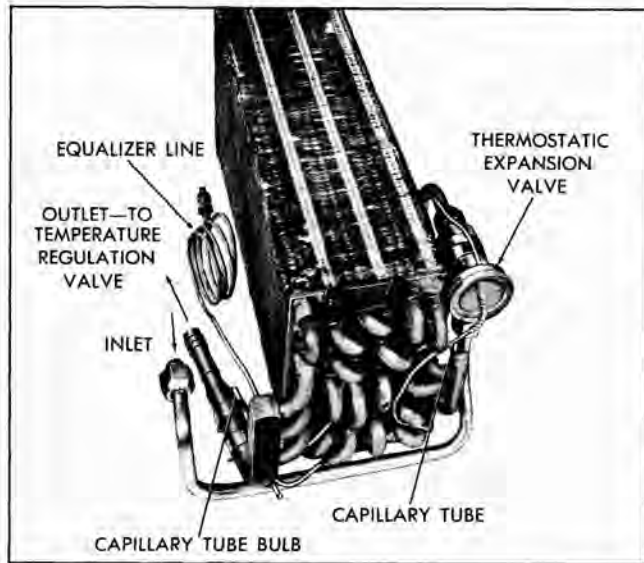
Thermostatic Expansion Valve at Evaporator Outlet Pipe
